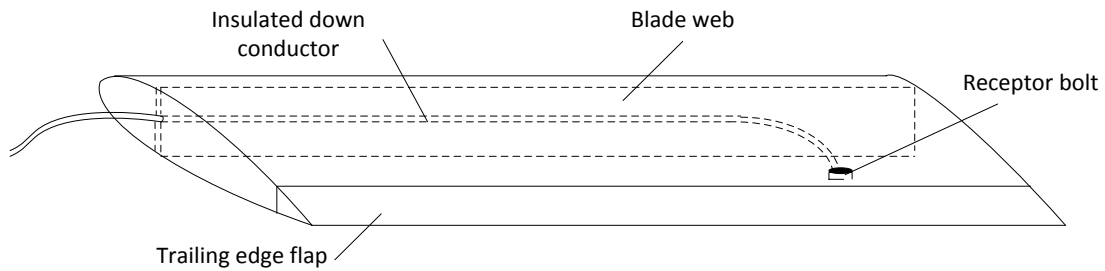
Drawing of the prototype for testing, consisting of a 2 m blade section with 1 m chord. The prototype is equipped with a rubber trailing edge flap and lightning protection.
